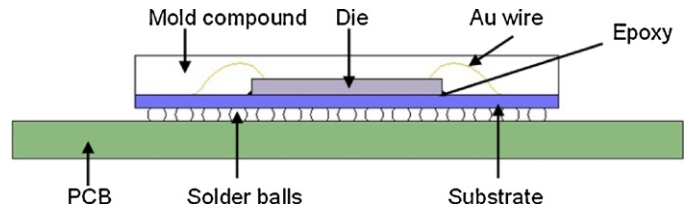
Cross section of a typical BGA packaging bonded on PCB.
